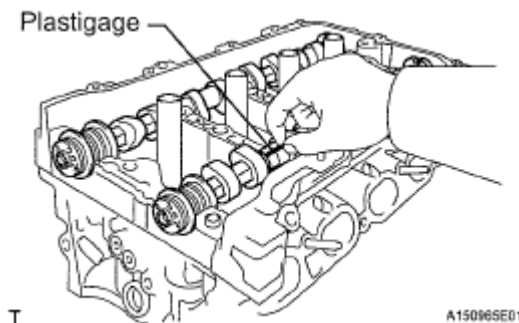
Inspecting Camshaft Oil Clearance
